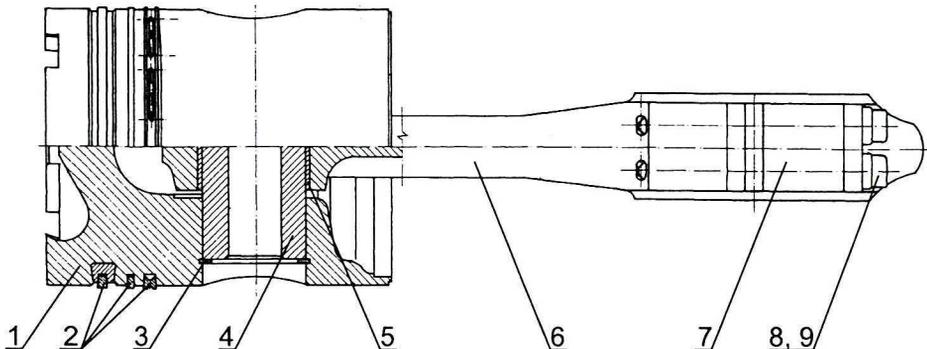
Piston-connecting-rod assembling set: 1) piston, 2) rings, 3) stopper rings, 4) pin, 5) connecting-rod sleeve, 6) connecting rod, 7) connecting-rod half-sleeve, 8, 9) bolt and sleeve
